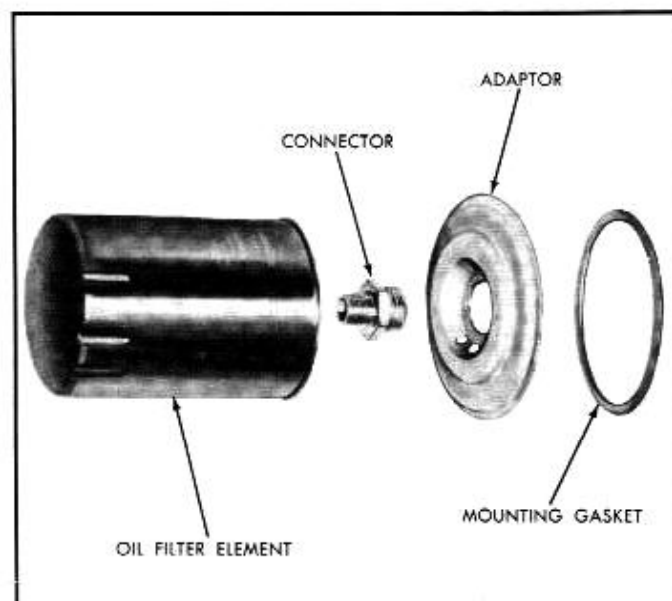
A-17—Disassembled View of Disposable-Type Oil Filter Assembly
